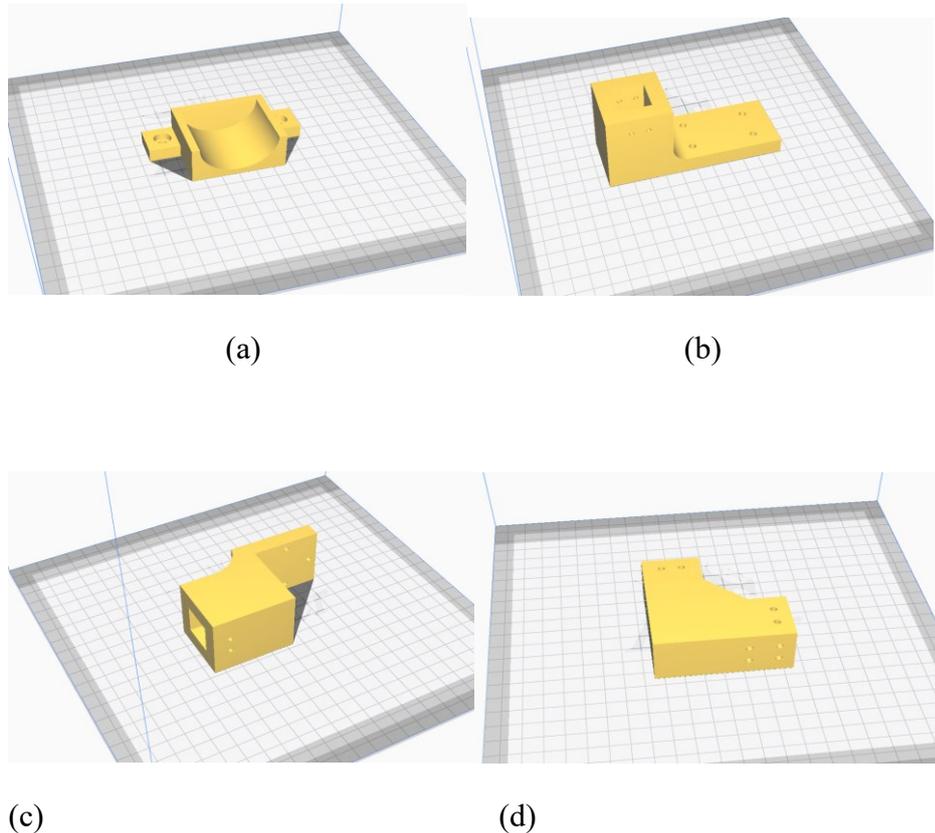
Design for 3D printing (a) R2 Mecanum wheel motor holder (b) R2 Actuator arm joint (c) R2 Stator arm joint (d) 2 l junction connector
